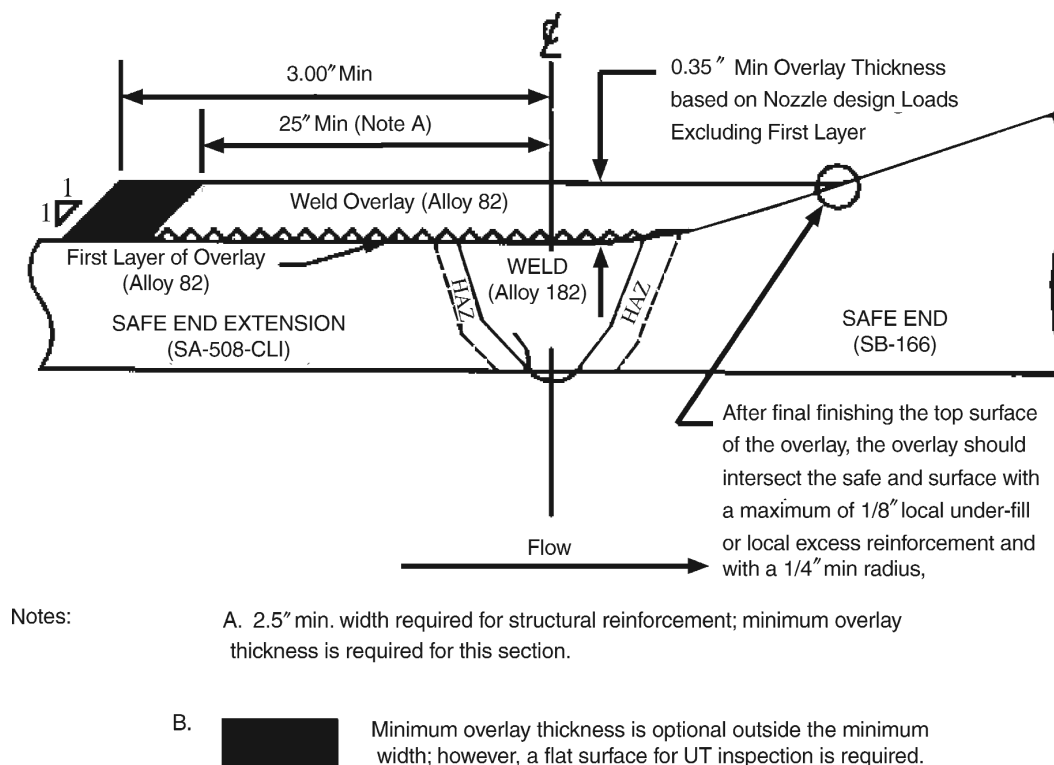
CORE SPRAY SAFE END TO SAFE-END EXTENSION WELD OVERLAY
